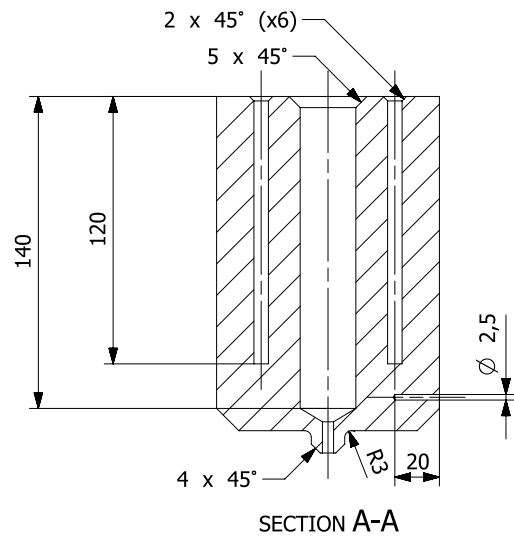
A detailed drawing of the injection chamber of the TrollLabs Rapid Prototyping Injection Molder.
